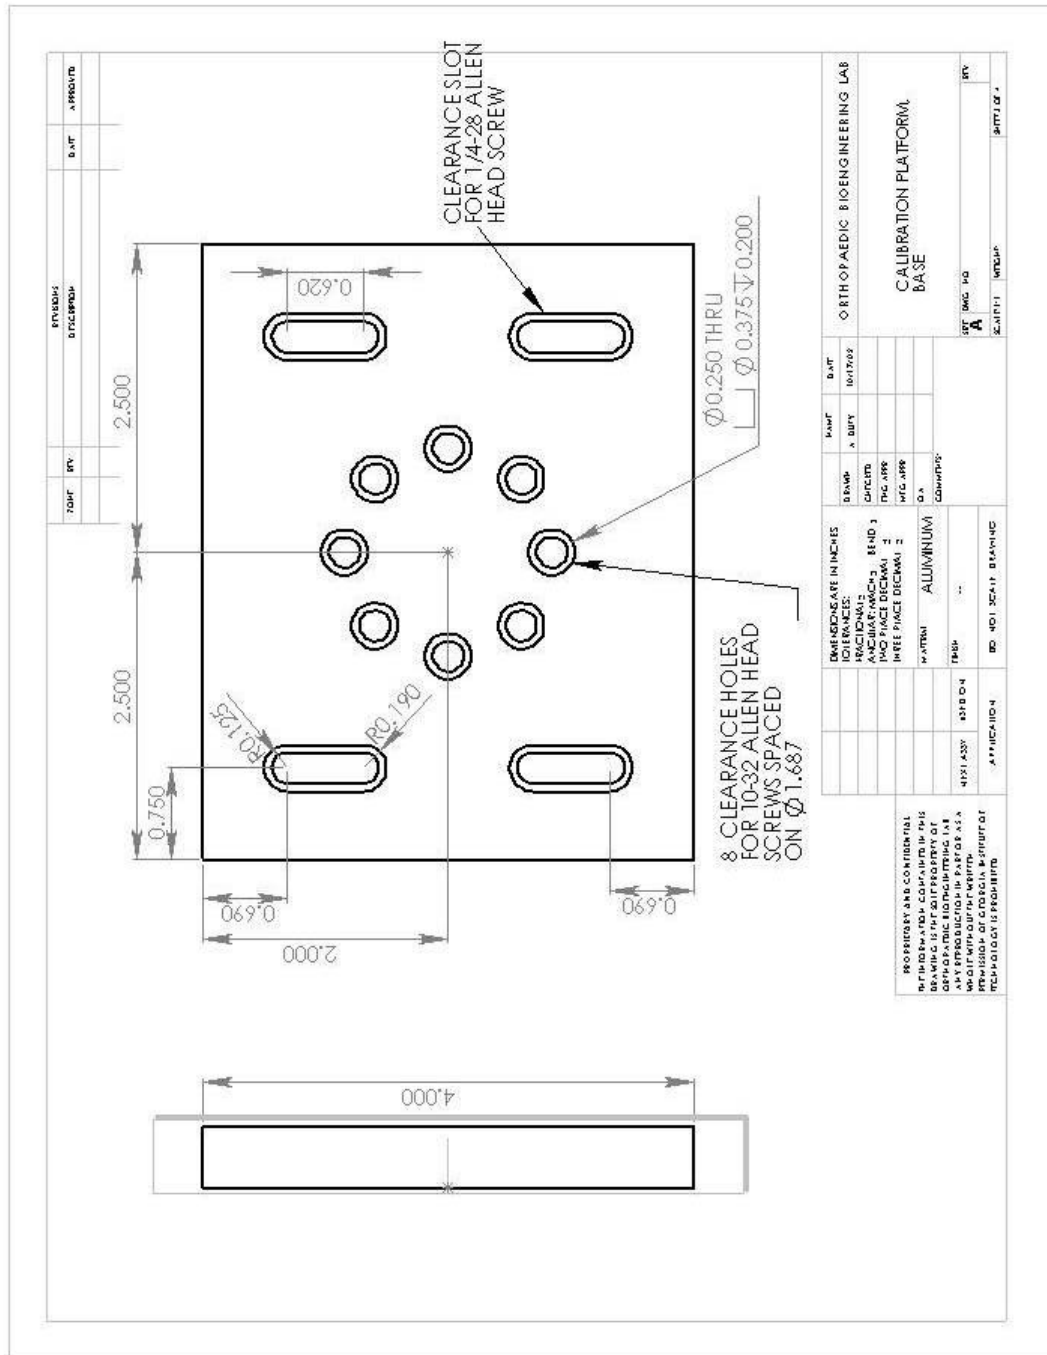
Machine Drawing of Platform Base with Circular Hole Pattern to Match Omega’s Ten-Pound Button Load Cell
